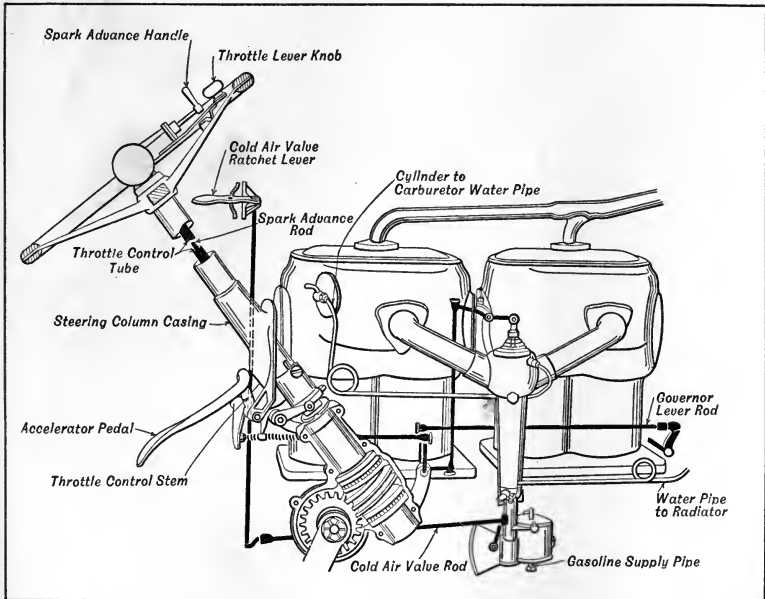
Parts of Motor Control System of Peerless Car. Spark Advance Regulated by Small Hand Lever. Gas Supply Controlled by Automatic Engine Governor, Accelerator Pedal or Throttle Lever on Steering Wheel.
